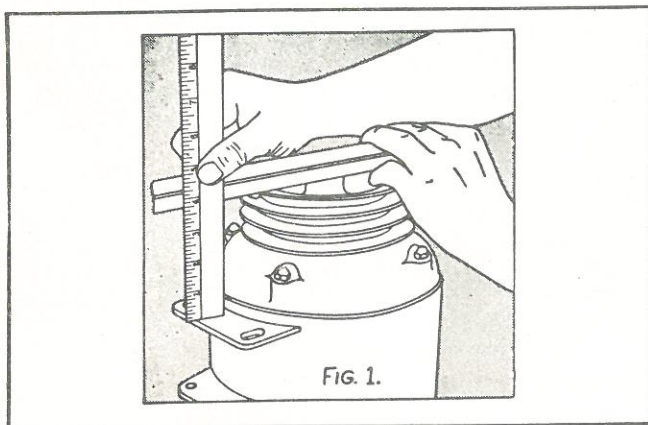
shows the proper position of the motor pulley on the shaft, $3\frac{3}{4}$ inches from the outer face of the pulley to the top of the ear on the motor frame.
